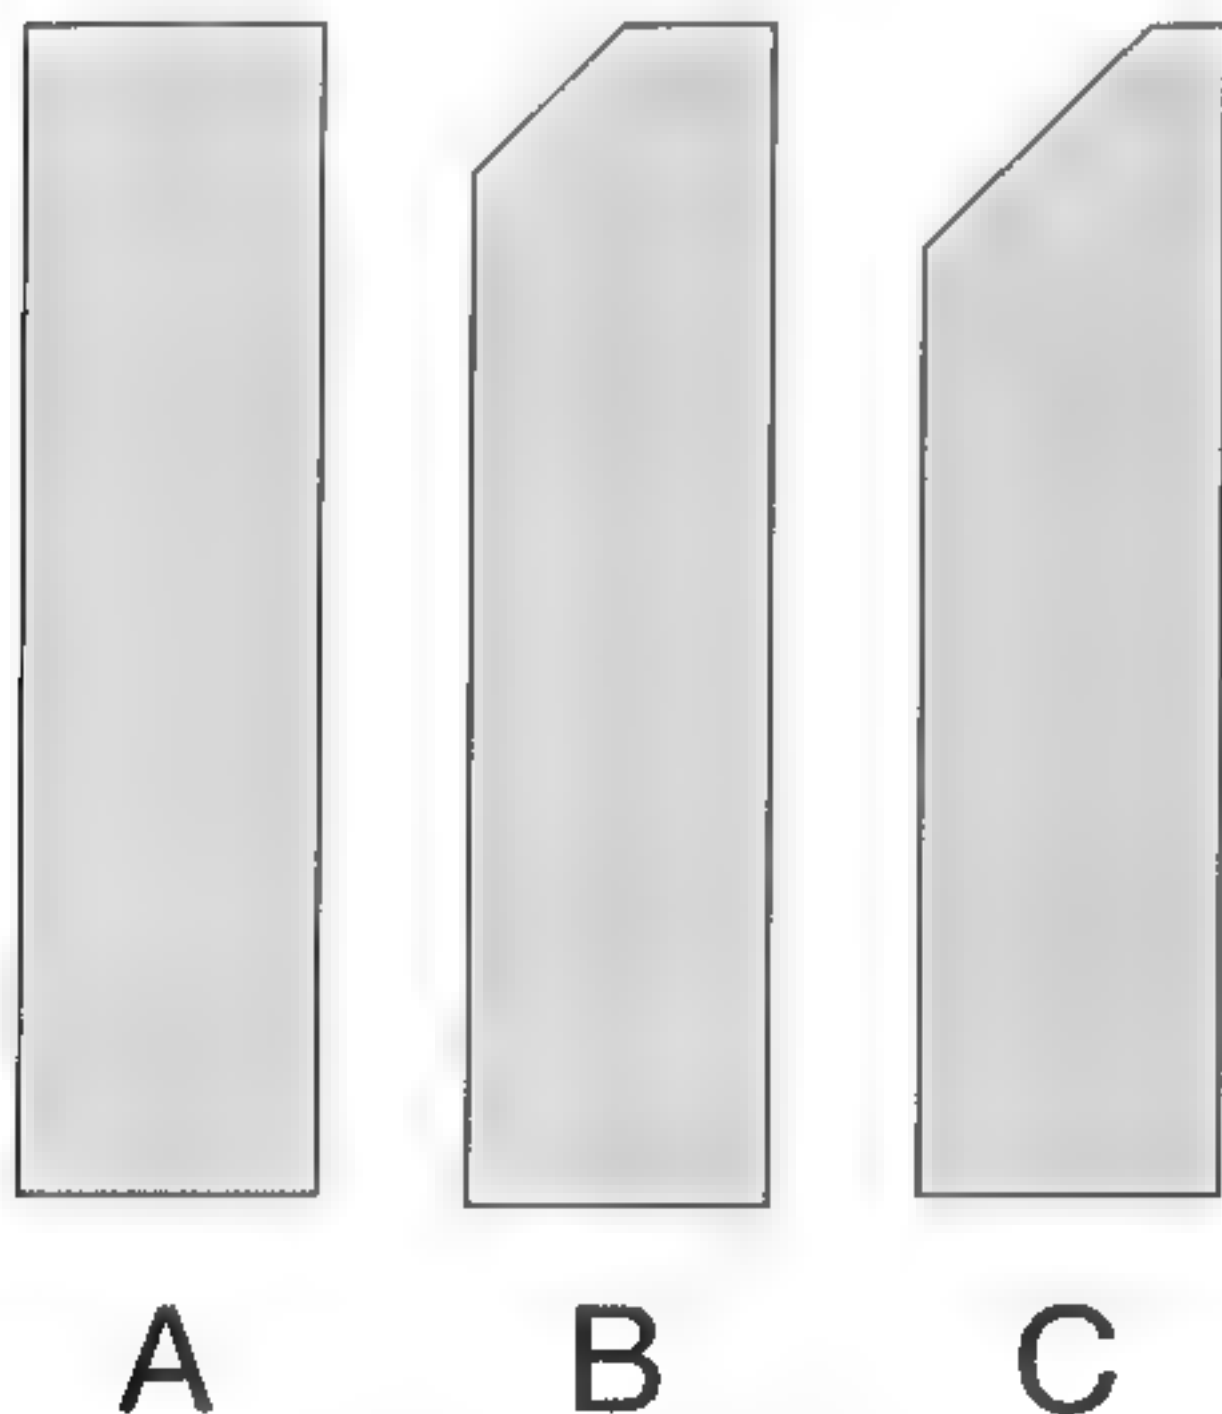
After the edge is smoothed, a bevel should be added to define the edge prior to buffing. Use care not to go too far or a knife edge can result. In these side-view cross sections, (A) represents the smoothed edge, (B) the correct amount of bevel, and (C) overbeveling to a near knife edge
